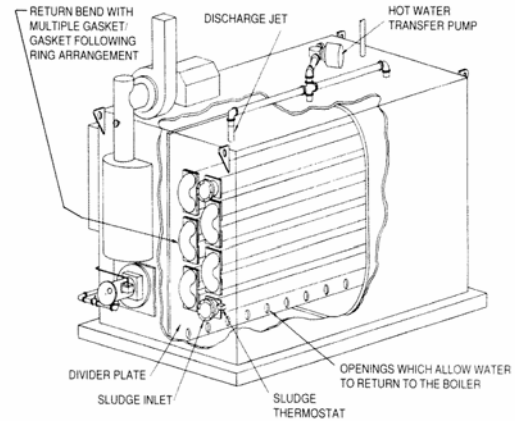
VIEW OF HEAT EXCHANGER SECTION
